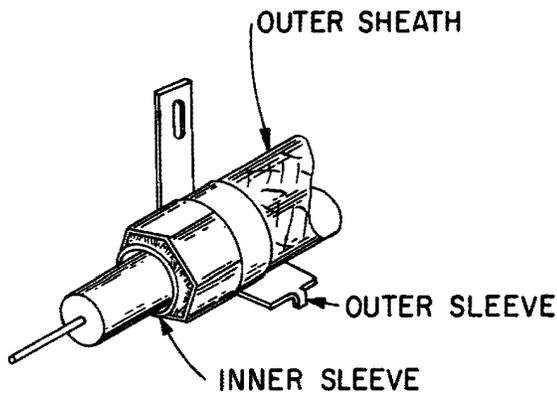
Portion of Coaxial Office Cable with Flag of Outer Sleeve Nearest to the Cable Butt
